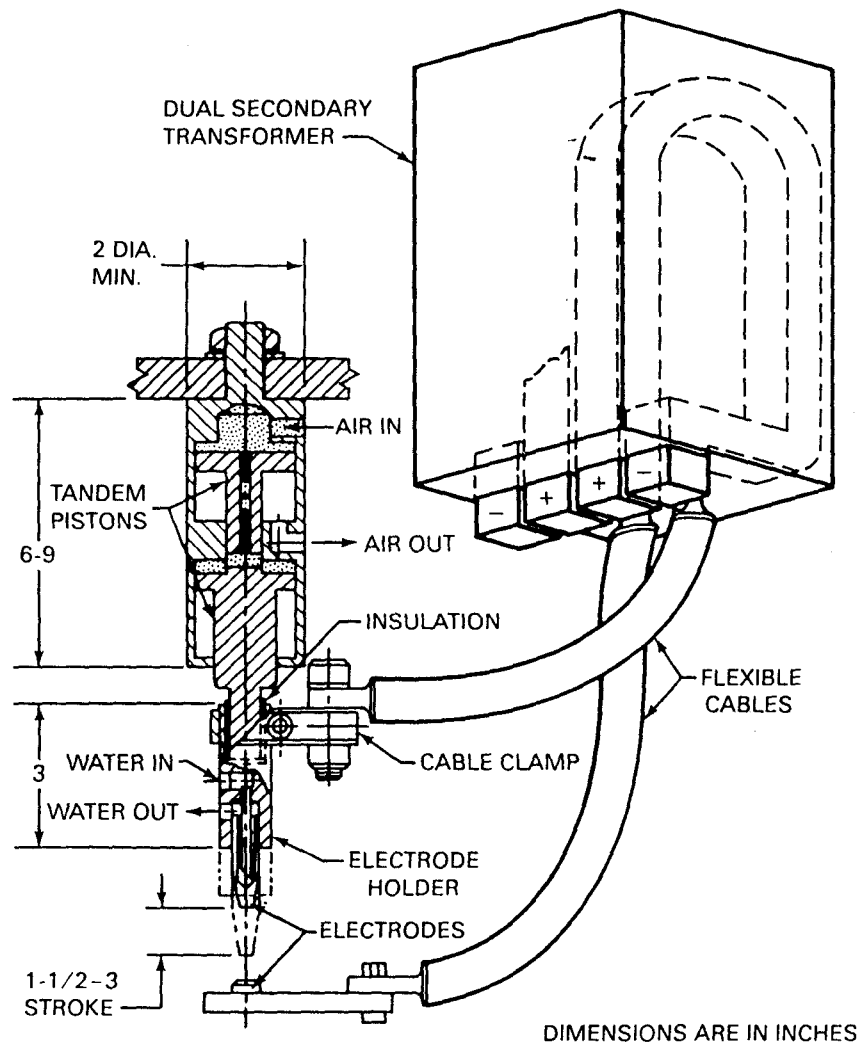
Basic Components of a Multiple Spot Welding System
